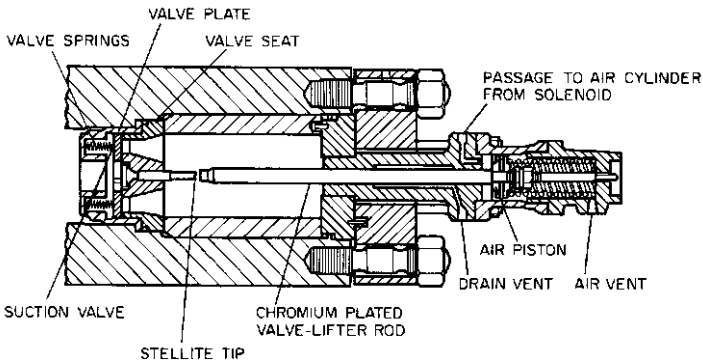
Synchronized unloading keeps the valve open through the use of a suction valve unloader.
